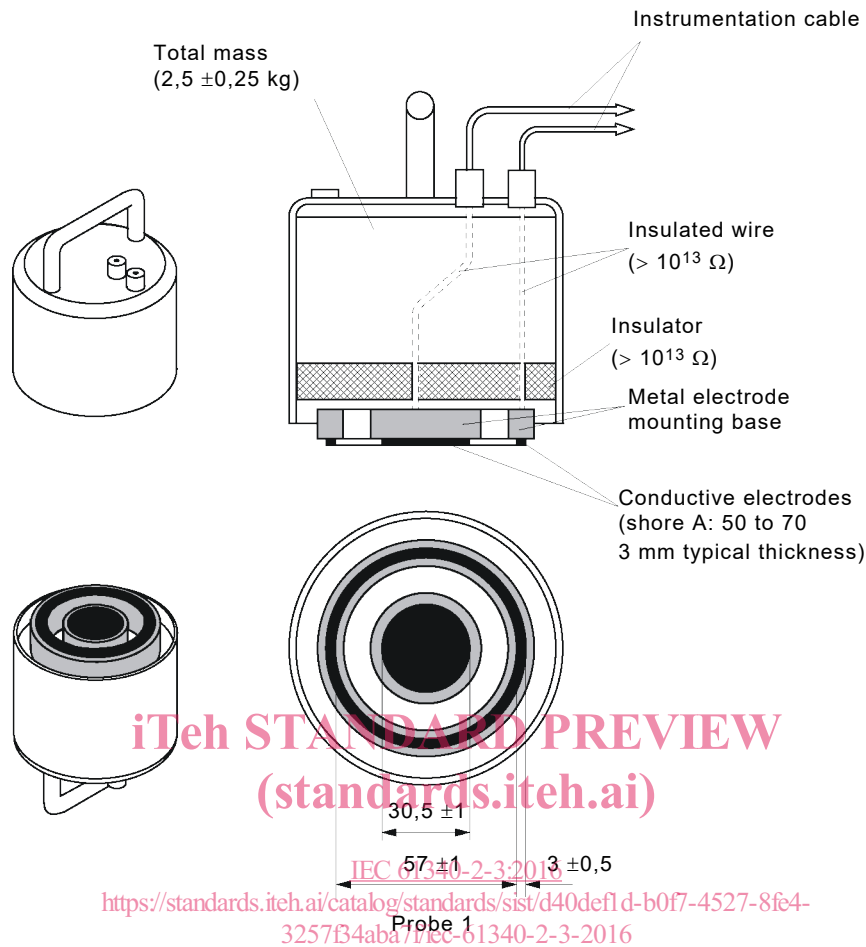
Example of an assembly for the measurement of surface and volume resistance
